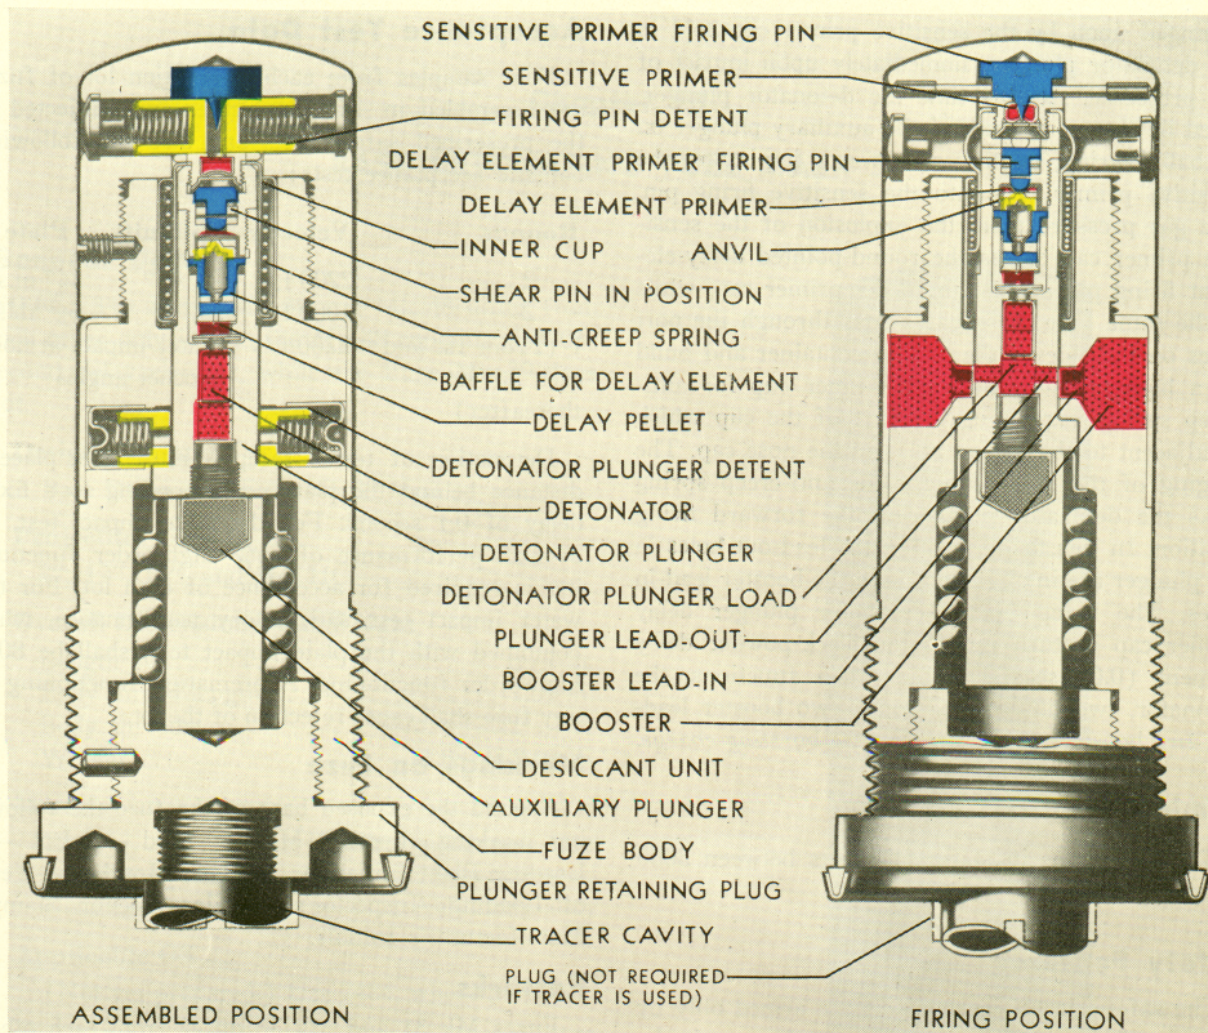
Base Detonating Fuze Mk 36— Sectional View
